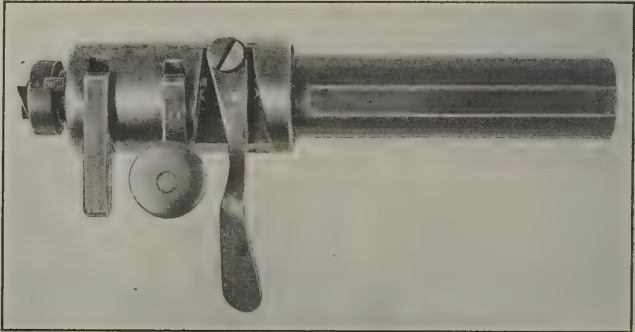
An Old Hollow Mill and Threading Die with Holder
